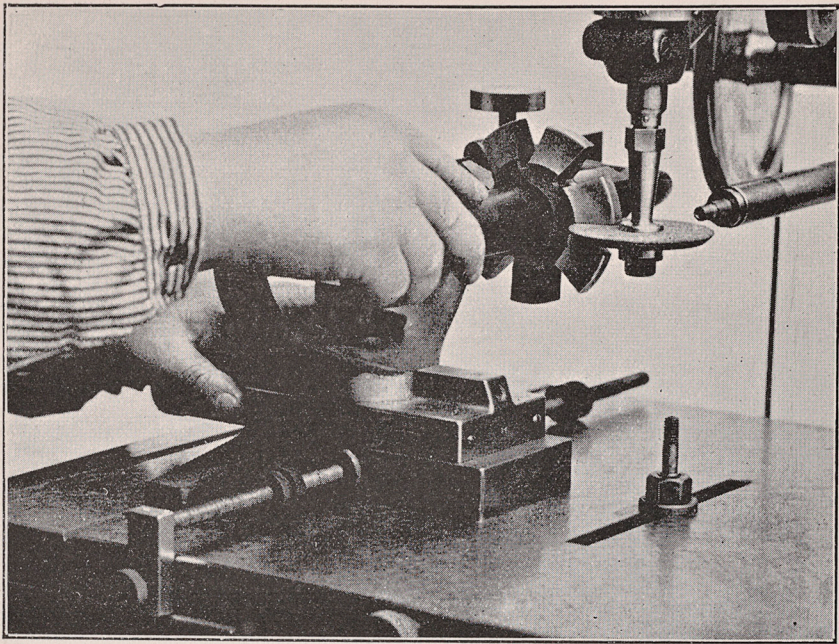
Grinding an ordinary relieved Gear Cutter.
